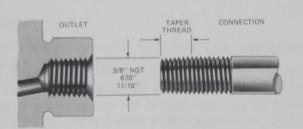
CONNECTION 240 3/8"-NGT RH INT. IPS accepting Tapered Threaded Pipe
